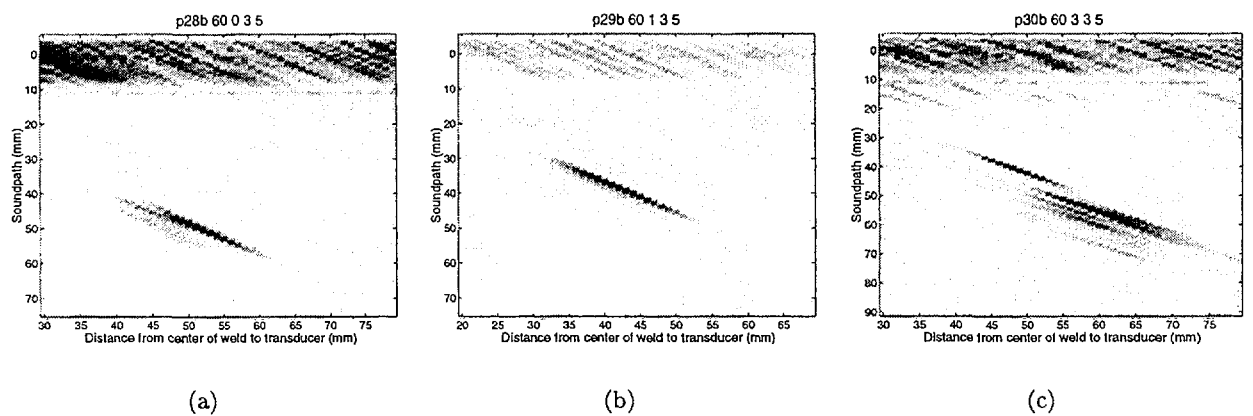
Backside measurements from porosity using the 60-degree 3.5 MHz transducer (a) 6 mm porosity, 22 mm from bottom surface (b) 8 mm porosity, 15 mm from bottom surface (c) 9 mm porosity, 26 mm from bottom surface.
